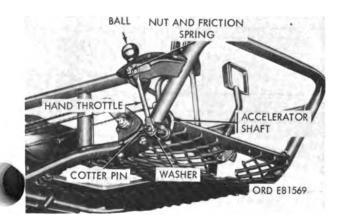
Location of cotter pin, hand throttle, and accelerator shaft.
